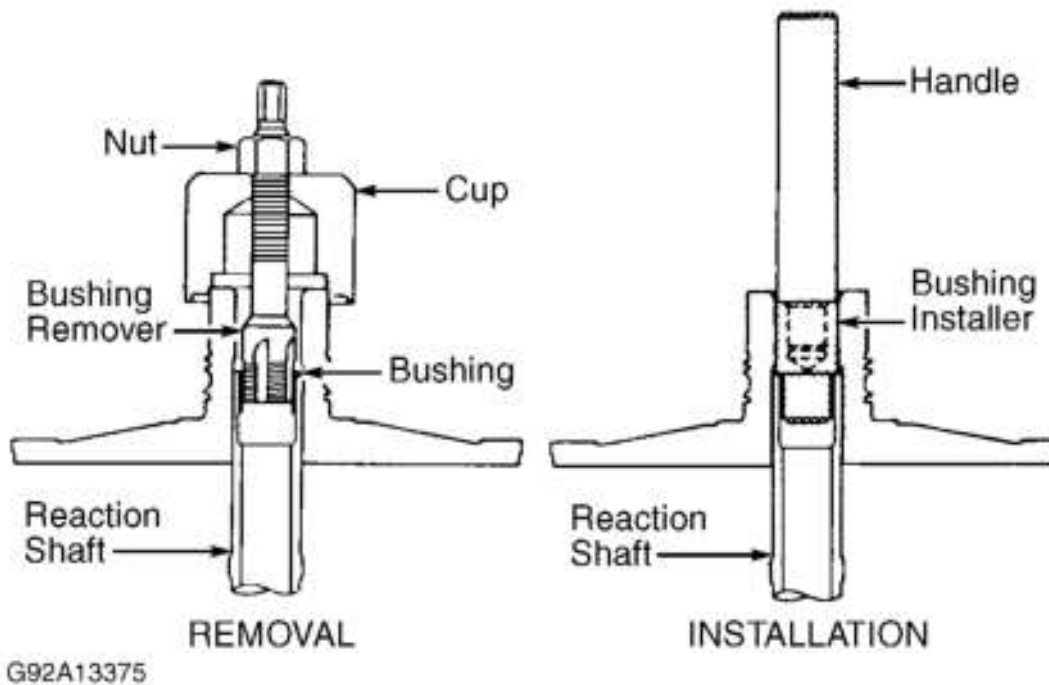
Removing & Installing Reaction Shaft Support Bushing
